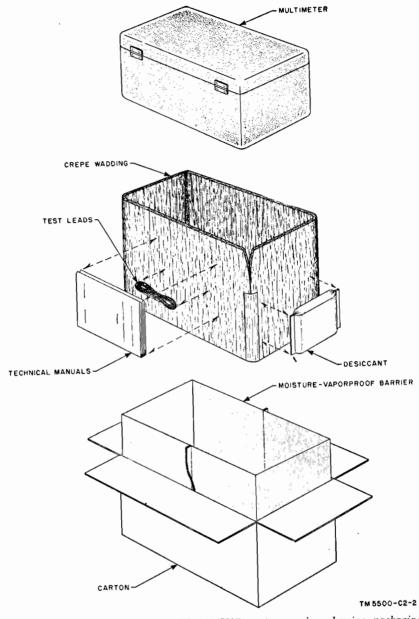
(Added) Multimeter TS-297/U(3), cutaway view showing packaging detail.
